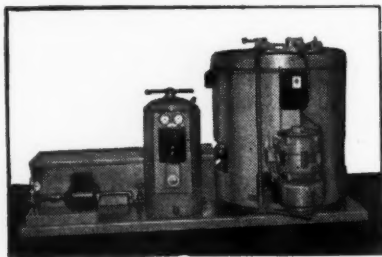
Hilliard Unit for Extracting Cutting Oil from Chips
